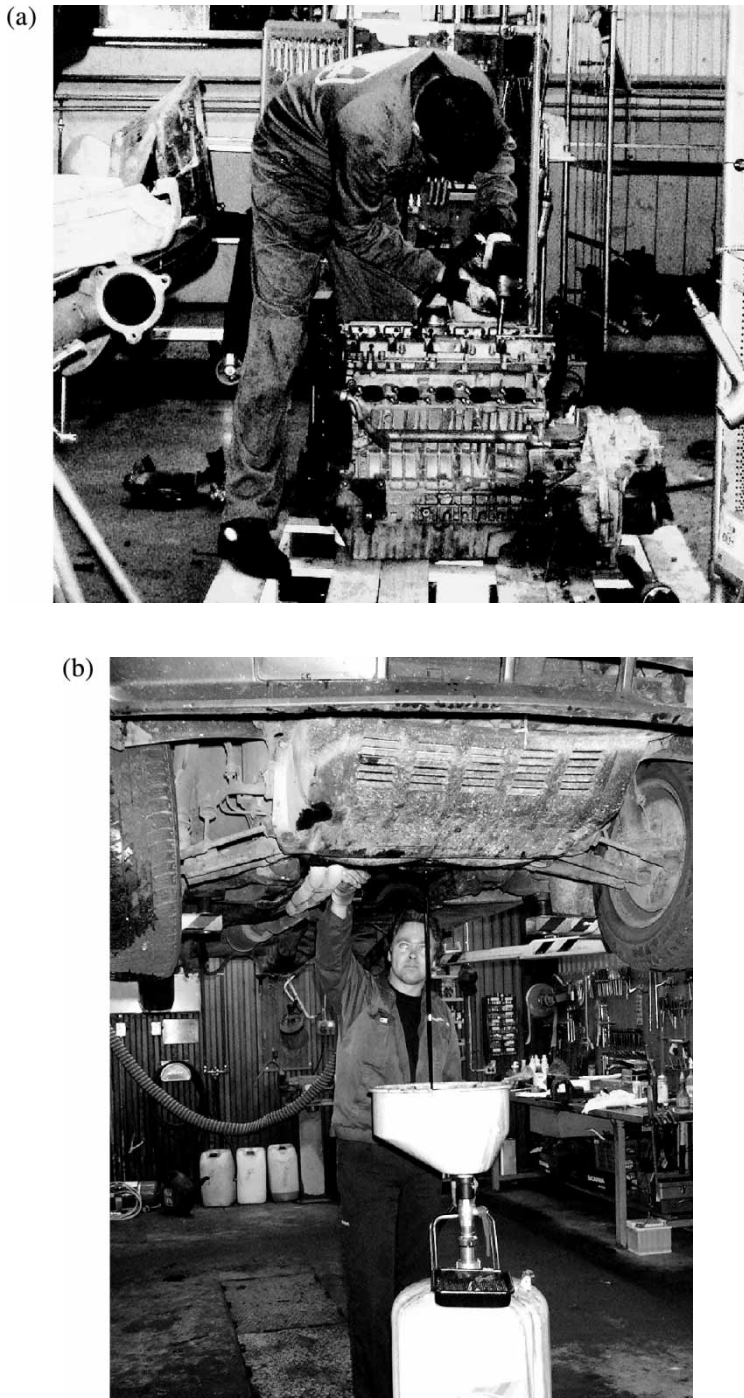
Disassembly of parts from a car engine: (a) unscrewing parts, (b) removing oil. Although poor working postures occurred, the duration generally seemed to be short.
